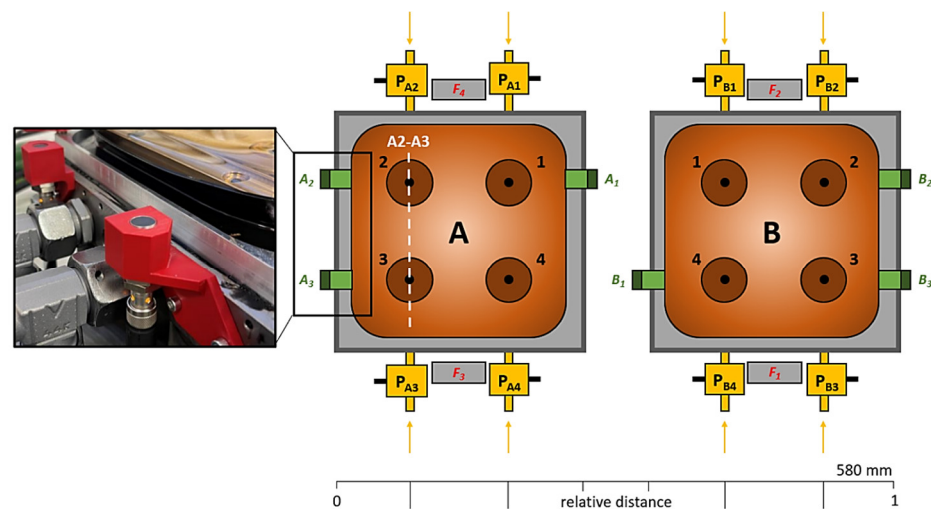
2PAD experimental HS bearing setup, sensor description and assembly error setting for (A) offset (step) and (B) tilt.
